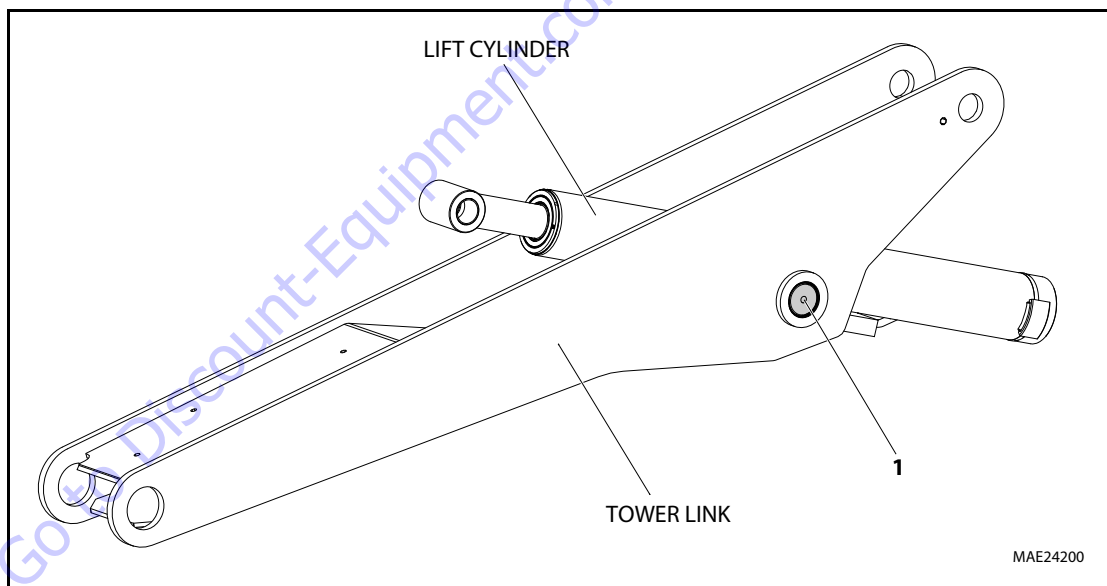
Main Boom Lift Cylinder Removal and Installation
